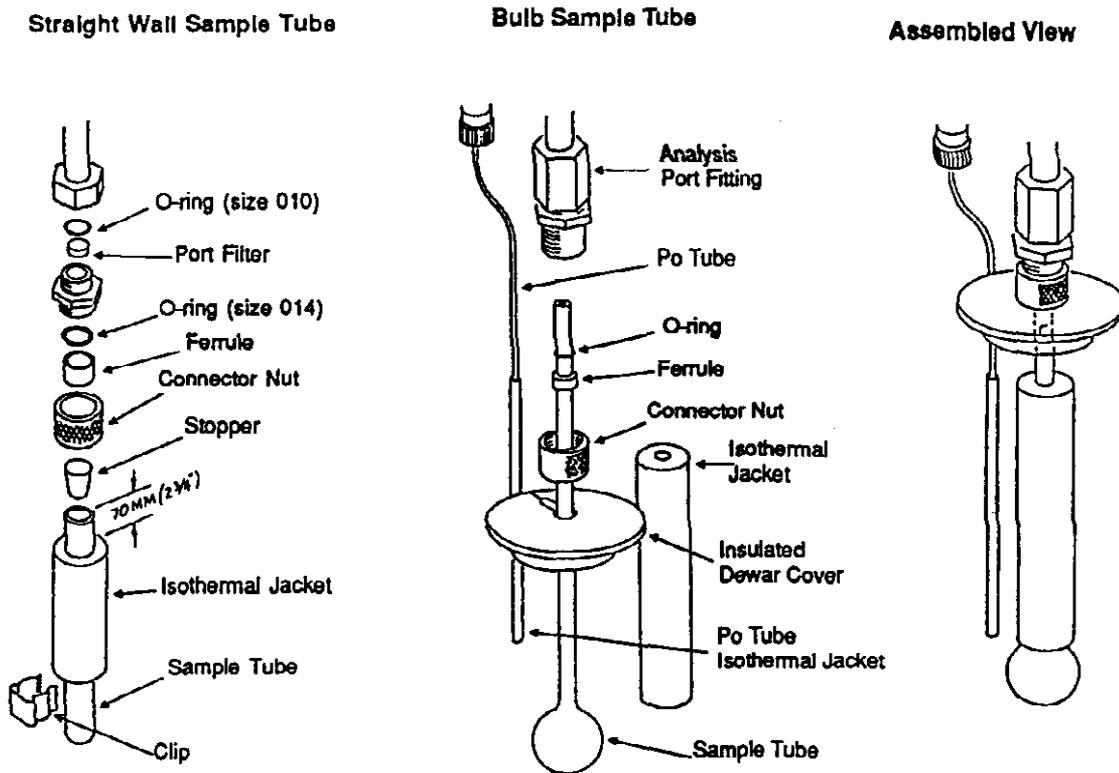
Preparing and Attaching Sample Tube to Analysis Port
